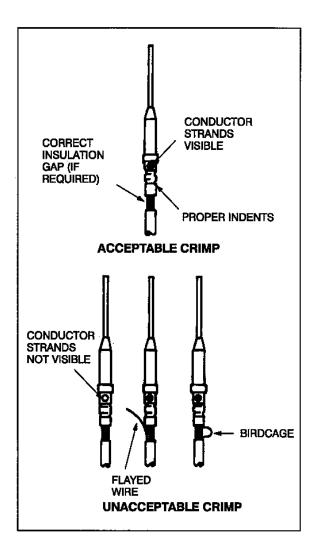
Wire in Terminal Should Be Visible in Inspection Hole
